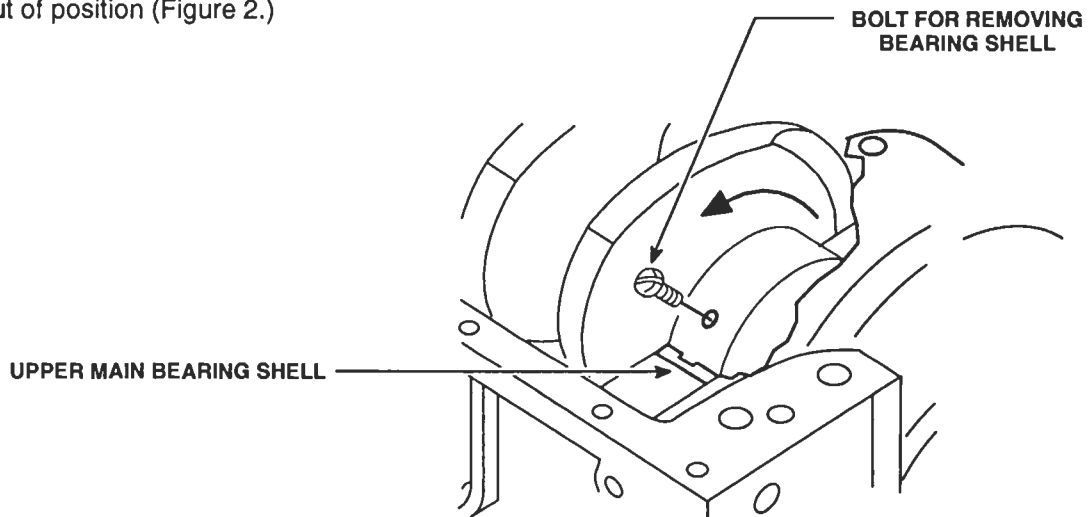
Removing Upper Main Bearing Shell (Except Rear Main)
